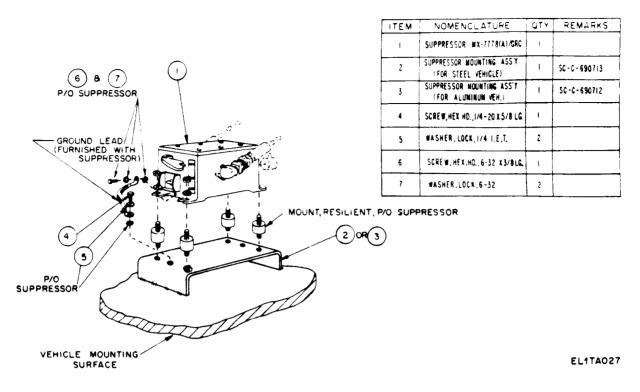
Exploded parts view of installation kit components for MX-7778A/GRC.
